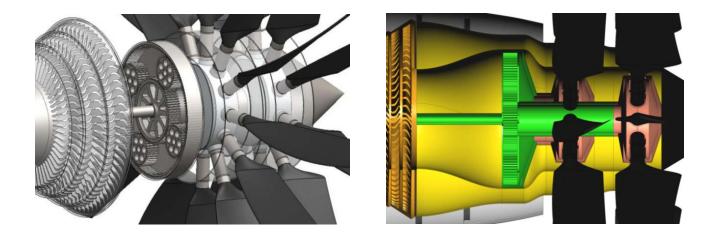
Isometric view (Left) and cross section view (Right) of integrated epicyclic gearbox.
